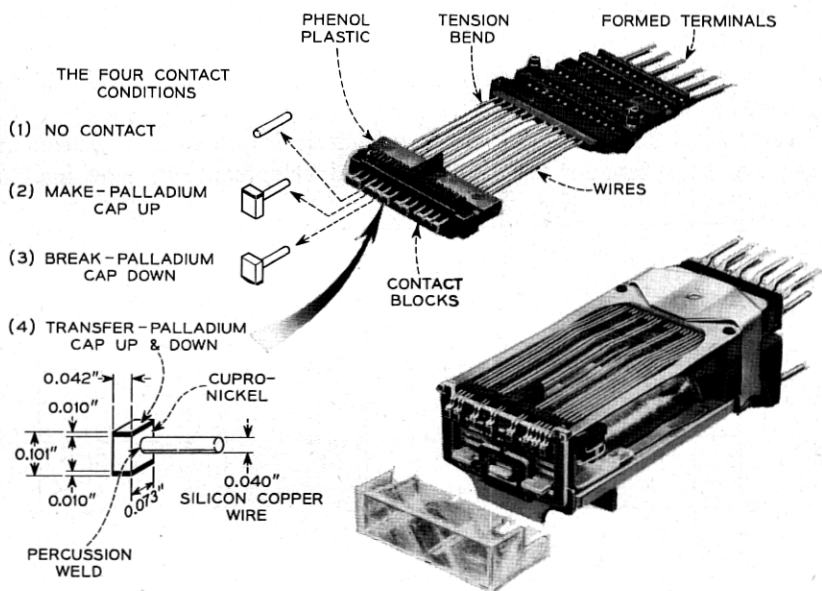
Single-wire comb with percussion welded contacts. Also view of wire spring relay.
